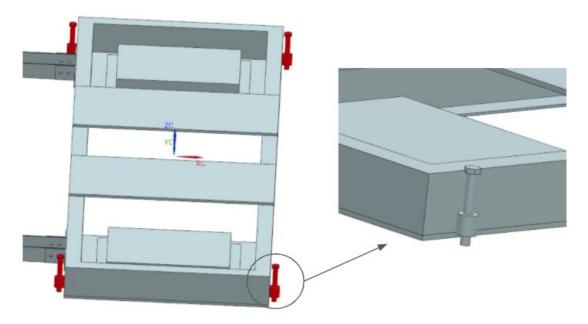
Screw "feet" for adjusting setup jig leveling. Feet are marked in red.
